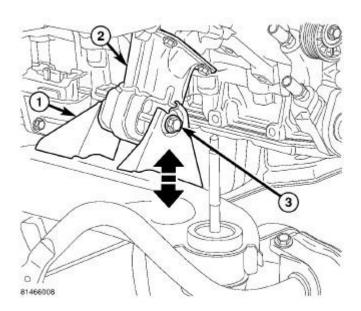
ENGINE MOUNT BOLT Courtesy of CHRYSLER LLC
